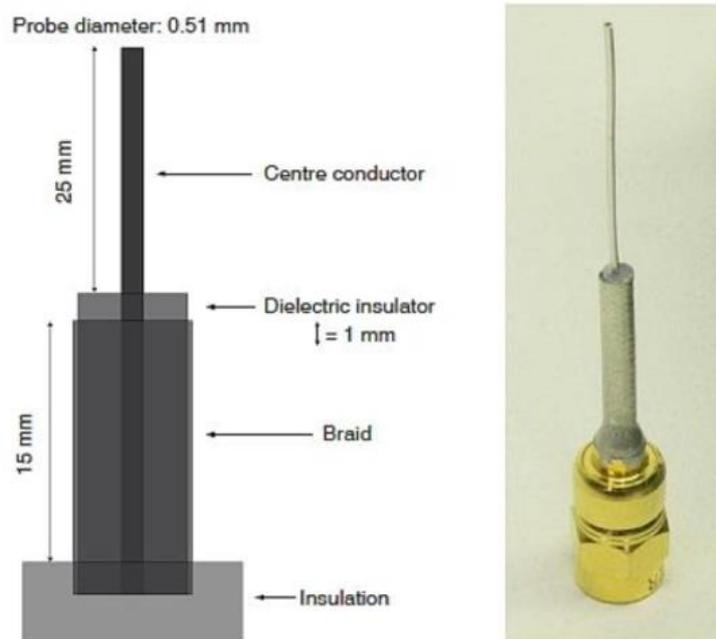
Technical drawing of mNLP of CubeStar probe [45]
